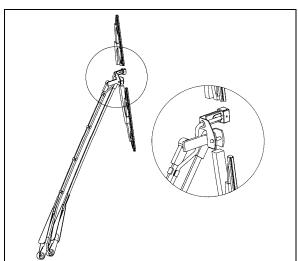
WINDSHIELD WIPER (DRIVER SIDE) 23334
